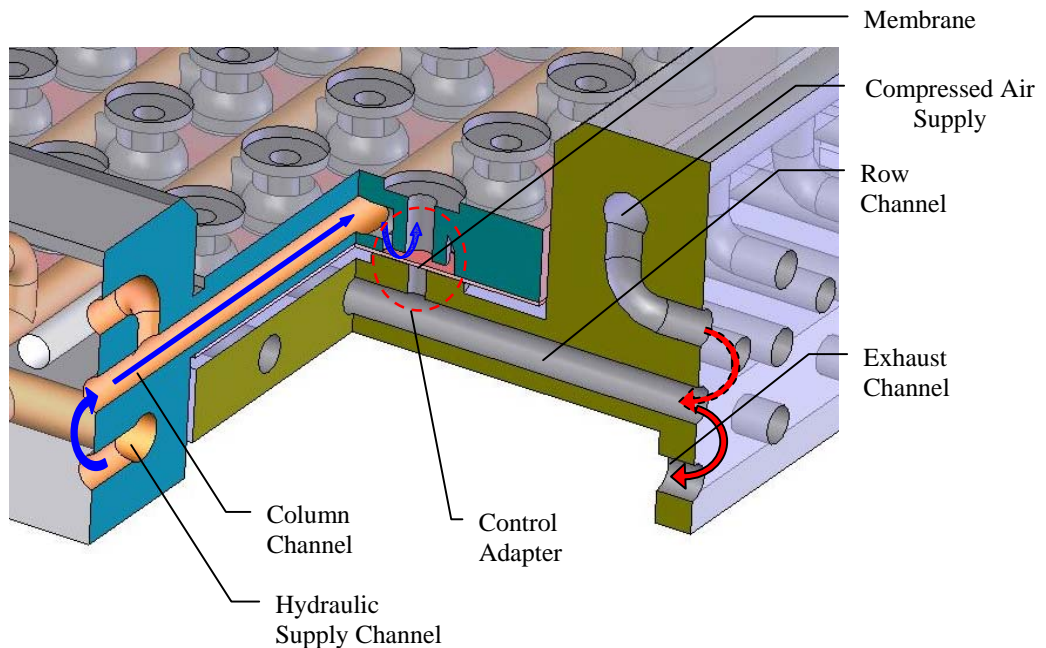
Assembly of the Row-Column Channel Hydraulic Boards
